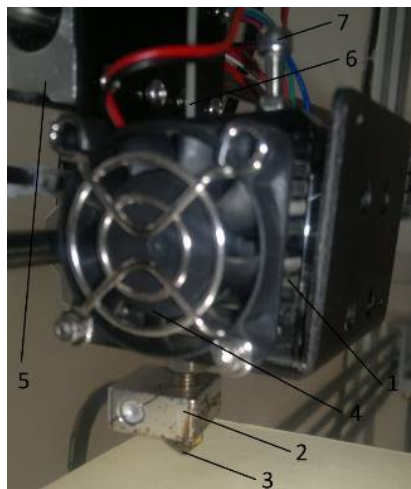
General view of the print head of a 3D printer: 1 – gear module for filing the thread (inside the structure), 2 – heating element; 3 – nozzle; 4 – cooling fan; 5 – case with guides; 6 – plastic thread (filament) 7 – support screw.
